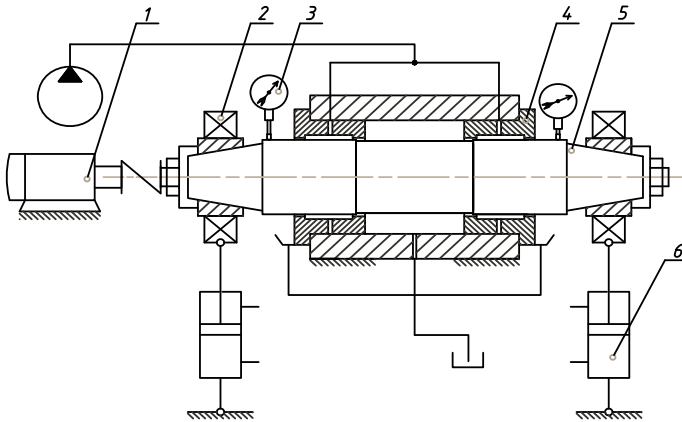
Hydrostatic spindle testing bench layout: 1—motor; 2—journal bearing; 3—radial indicator; 4—bearing bush case; 5—spindle; 6—pneumatic cylinder
